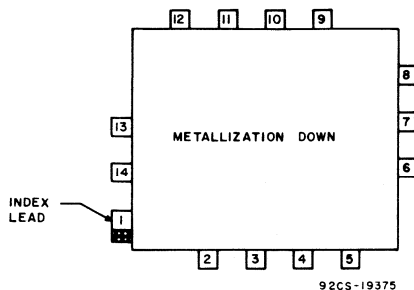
Terminal layout for CA3049L (14-lead configuration)
